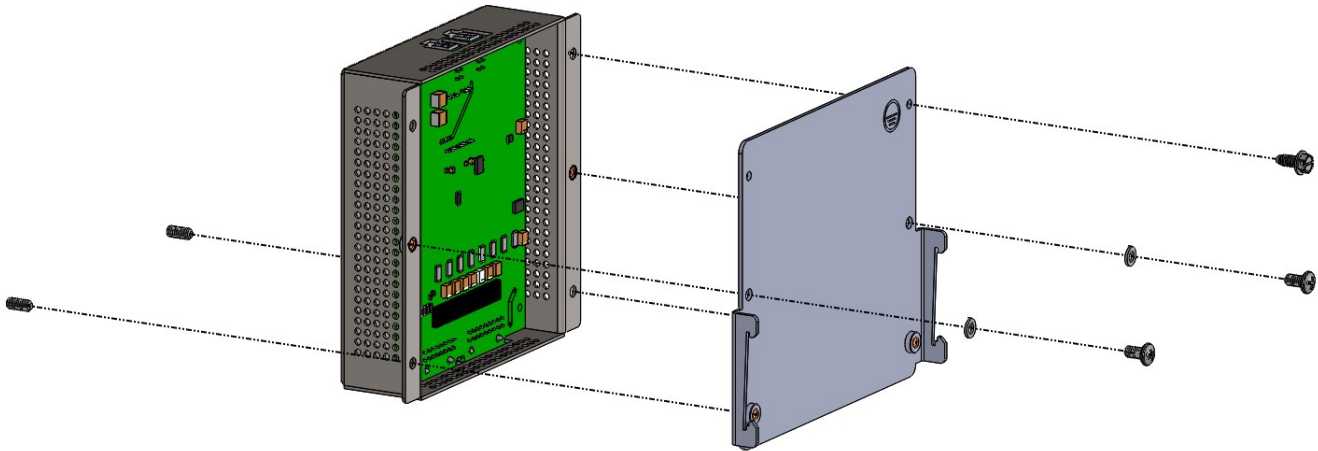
Exploded view of Cell Interface and mounting bracket assembly
